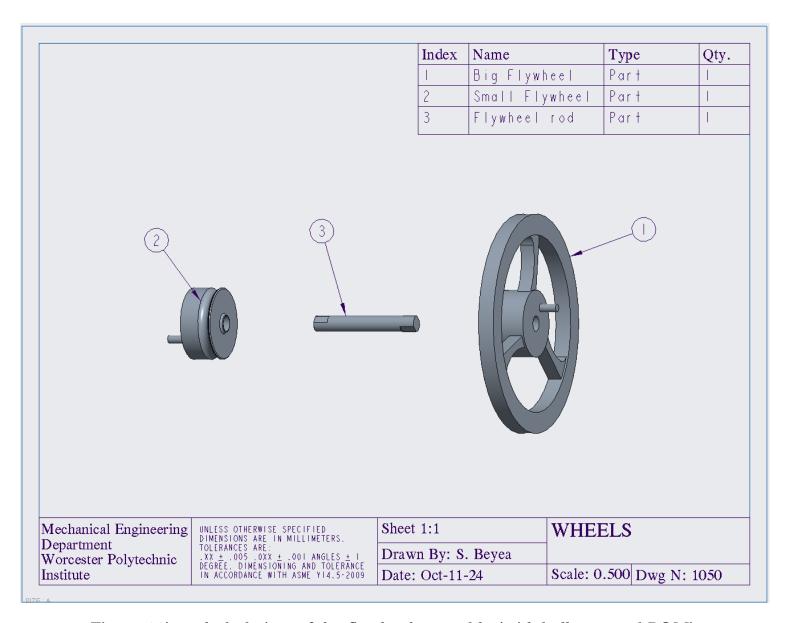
exploded view of the flywheel assembly (with balloons and BOM).
